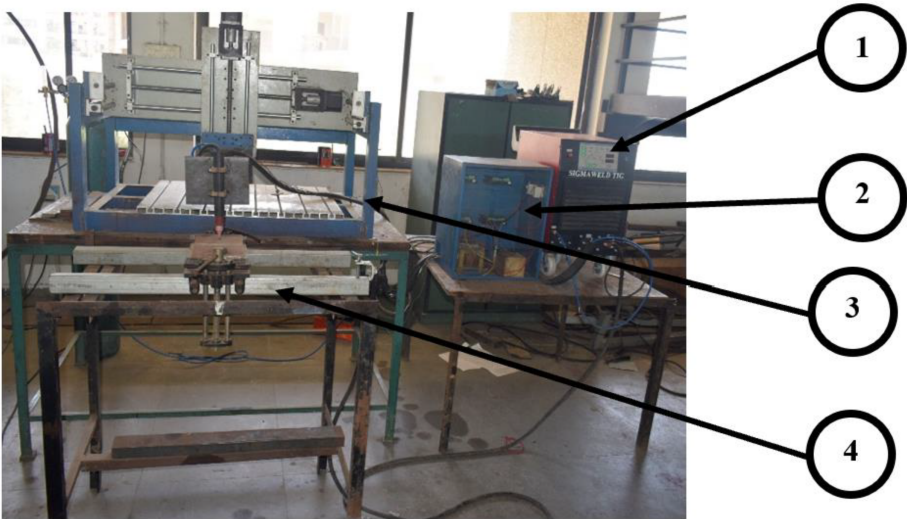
| IIoT enabled TIG Welding Machine. (1) Weldpower source, (2) IIoT module, (3) CNC welding machine, (4) Work holding table.
